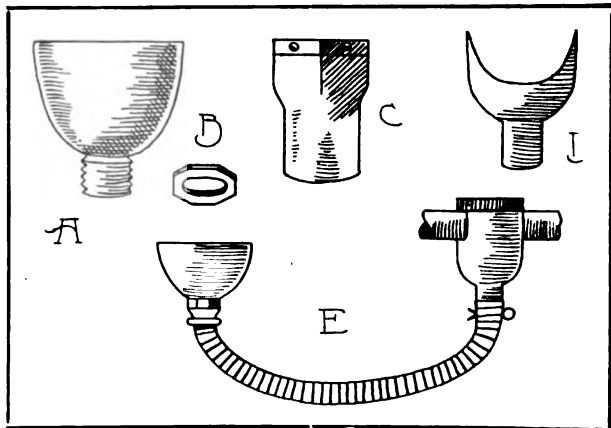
The Parts and the Assembled Unit of an Easily Made Carburetor Stove.
